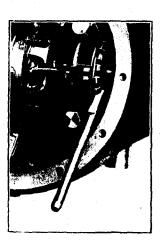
Adjusting Gear Mount Bearing with Bar 72799
